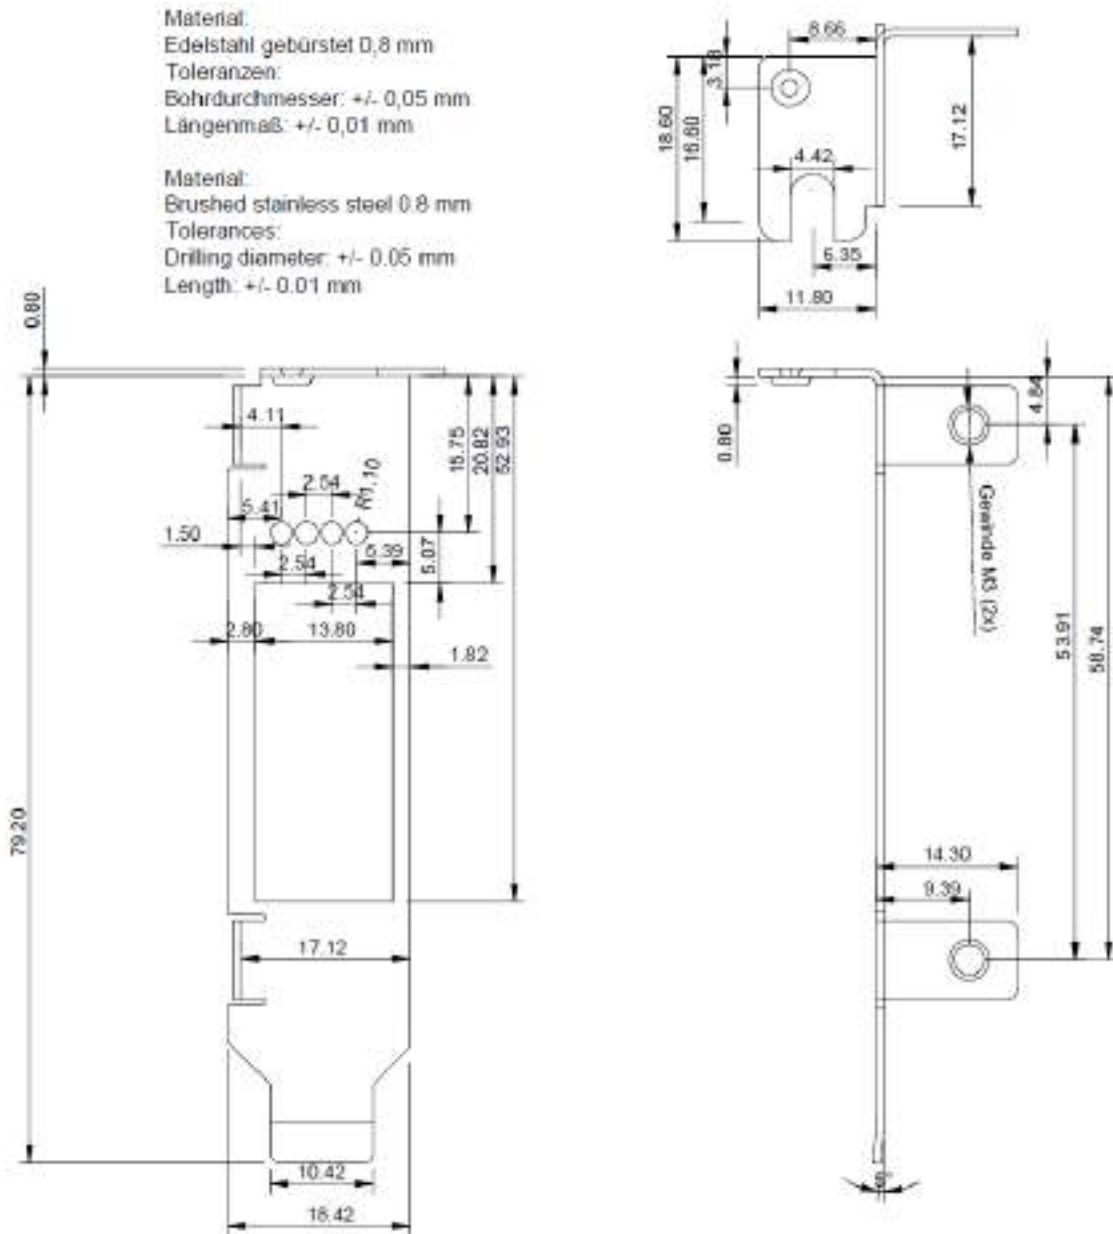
Dimensions Front Panel CIFX 70E-DN, CIFX 70E-DNMR
